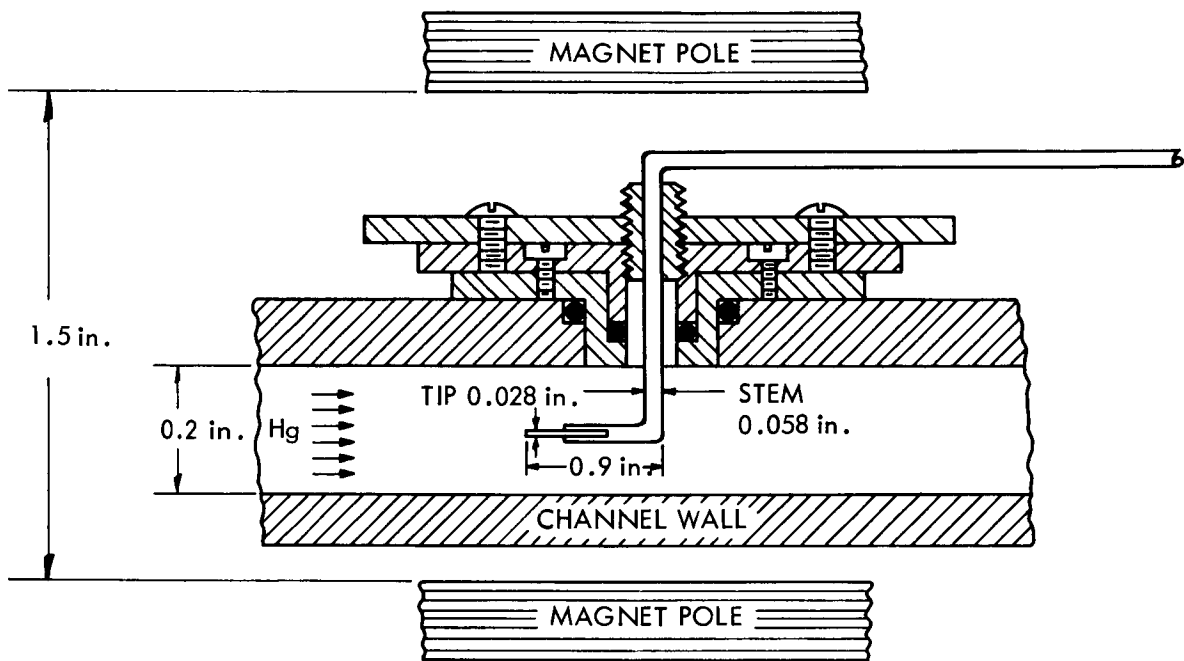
Cross-section view of the pitot tube apparatus.
